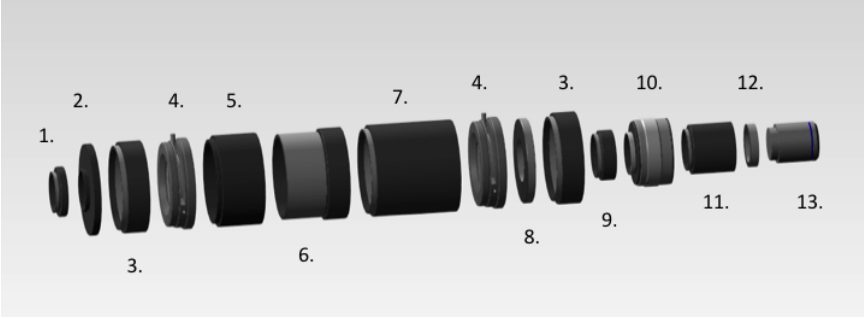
Exploded view of the tube lens. The components are numbered and listed in Table D.1.
